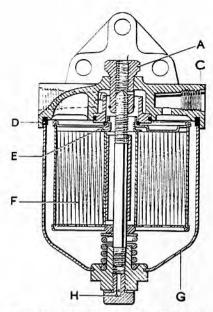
CROSS SECTION OF C.A.V. FUEL FILTER. (See key of Fig. 109)
